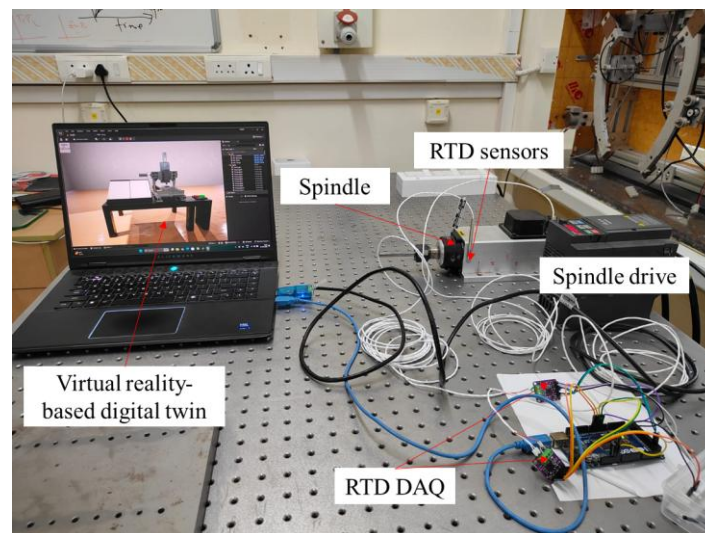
SpindleTwin: Digital twin for machine tool spindle.
